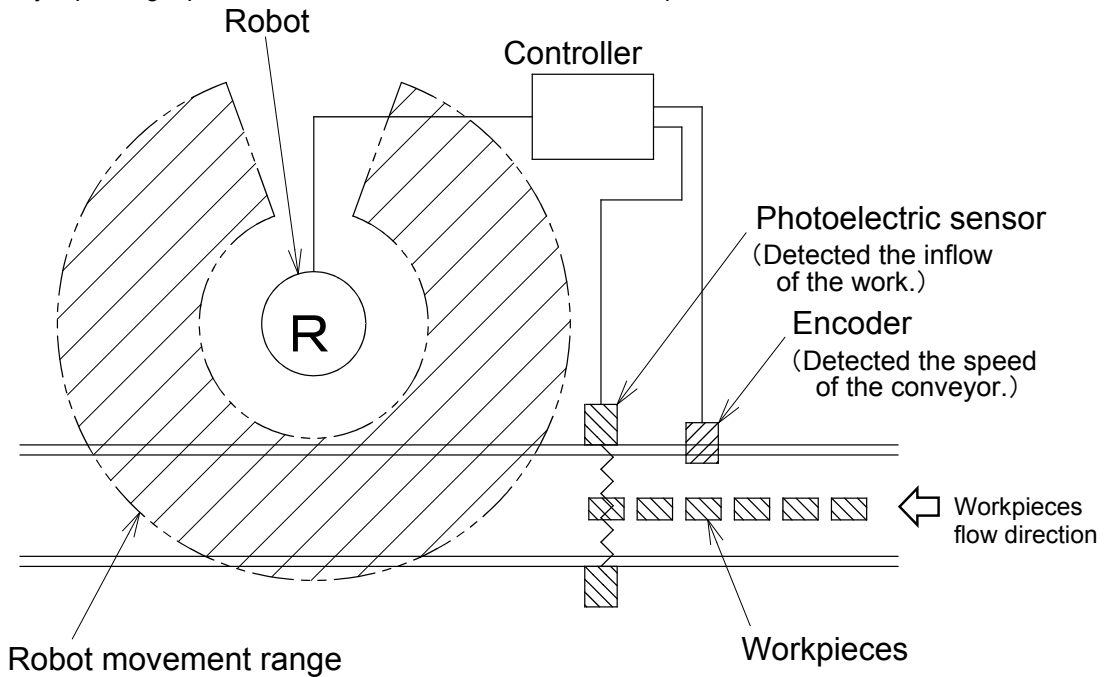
Configuration Example of Conveyer Tracking (Top View)
